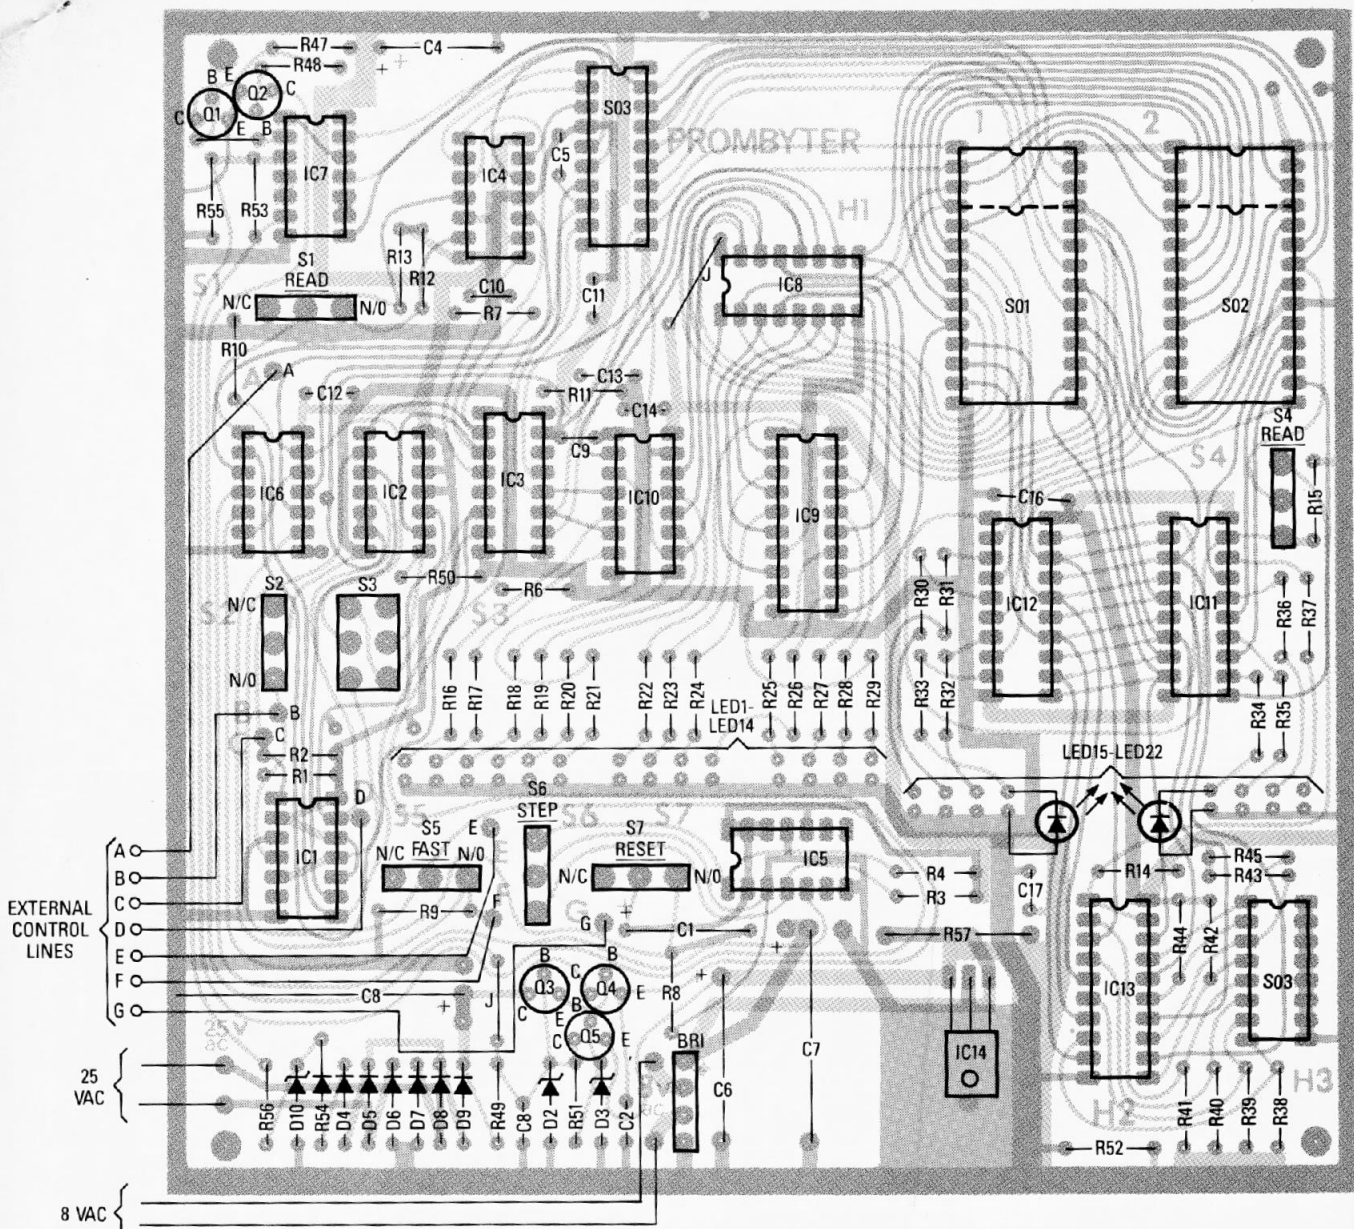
THE EPROM PROGRAMMER'S PC BOARD is double-sided; all components mount as shown here. Since a home-made board's holes are not plated through, the IC sockets must be mounted slightly above the board so that the socket pins can be soldered to the top side of the board.
